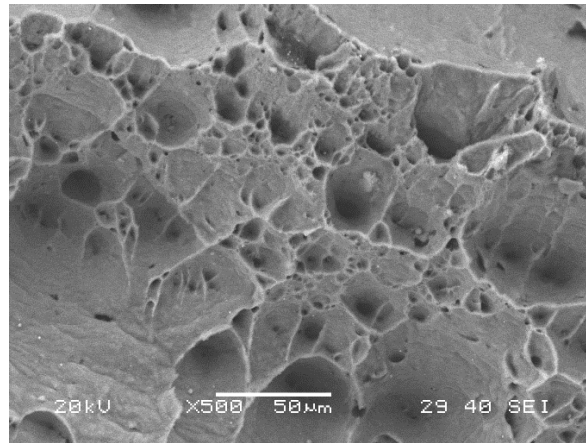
Magnified view of area 1 in weld 16
